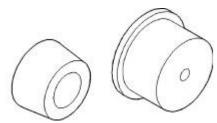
INSTALLER, SEAL - 6926 Courtesy of CHRYSLER LLC
